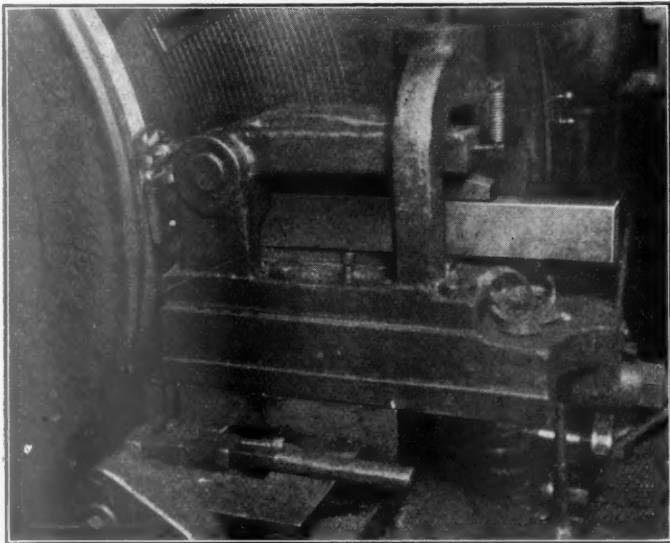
No. 18AA Roughing Tool in Driving Wheel Lathe
